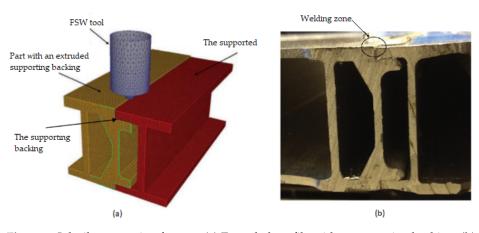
Inbuilt supporting feature. (a) Extruded profile with a supporting backing; (b) the actual shape after extrusion [14].
